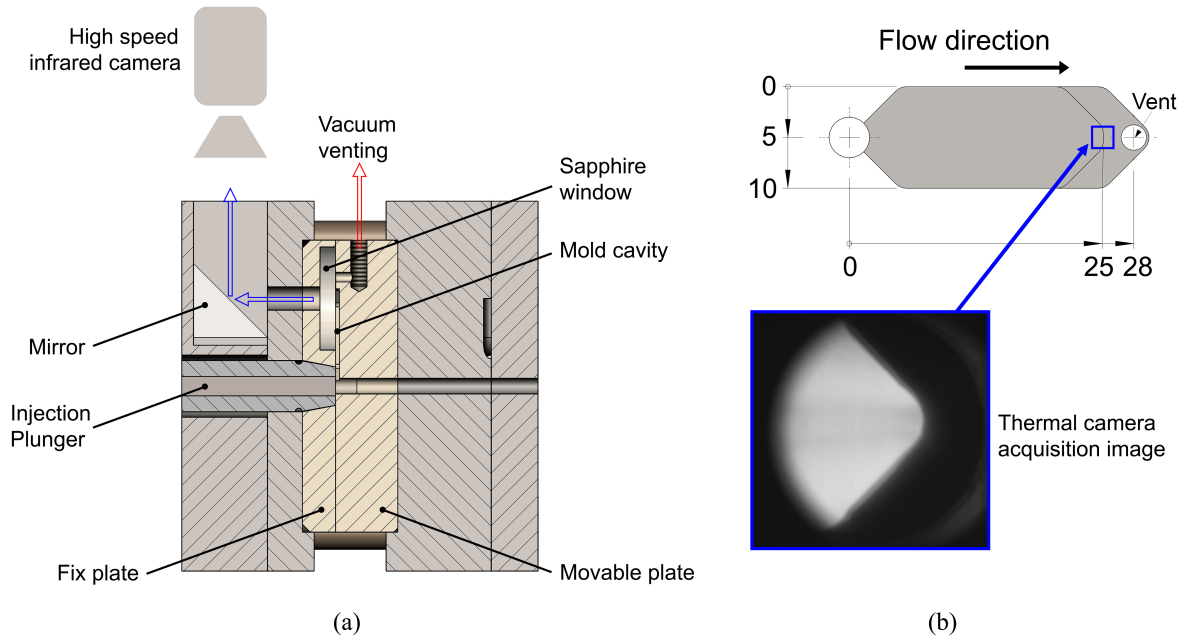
Mould design (a); schematic top view of the part design and the image from the IR camera (b)
